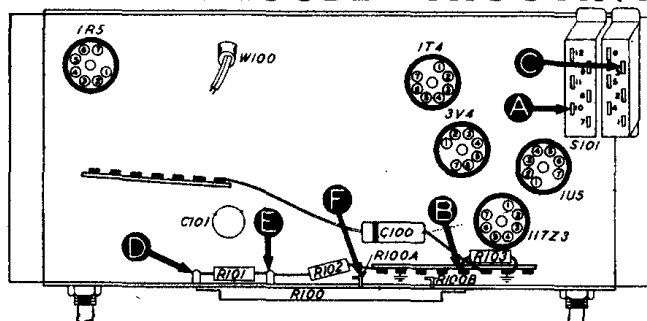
BOTTOM VIEW, SHOWING SECTION 1 TEST POINTS
